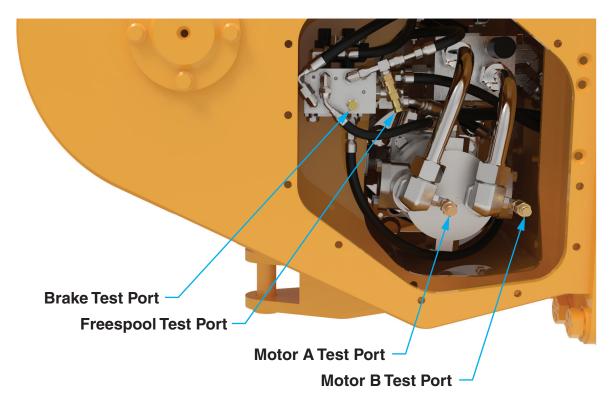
Hydraulic Pressure Test Ports (Units without optional DRAG-BRAKE)
